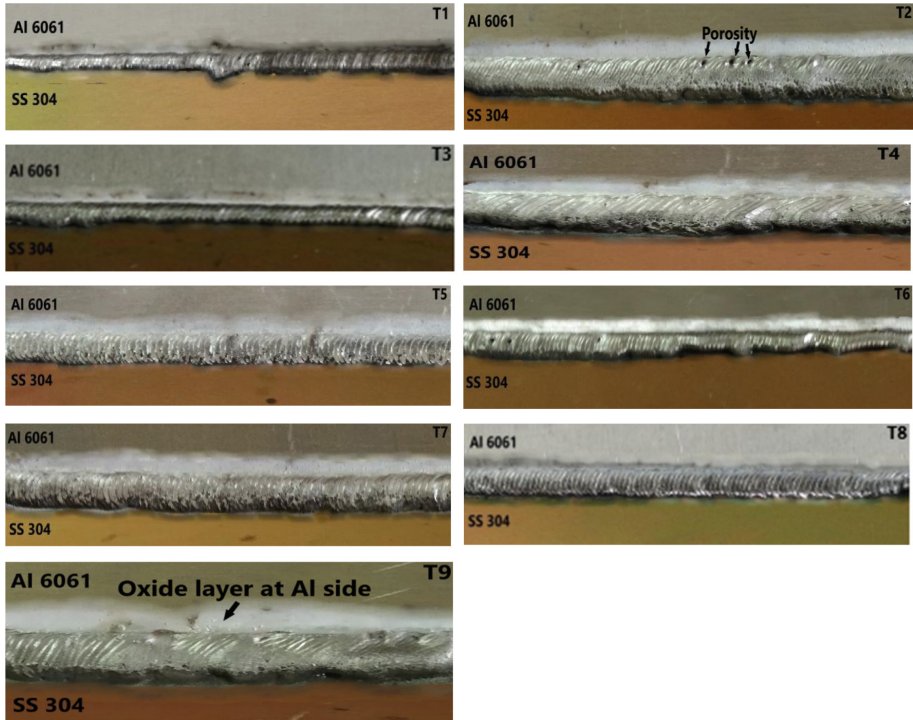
Cross-sectional morphology of fusion zones with varying CMT welding parameters.
